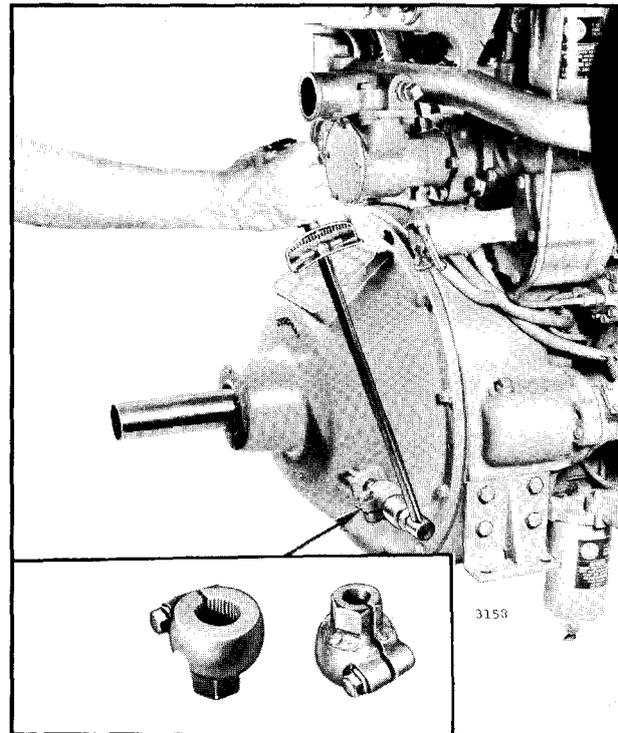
Power Take-Off Clutch Adjustment Check with Torque Wrench and Adaptor
